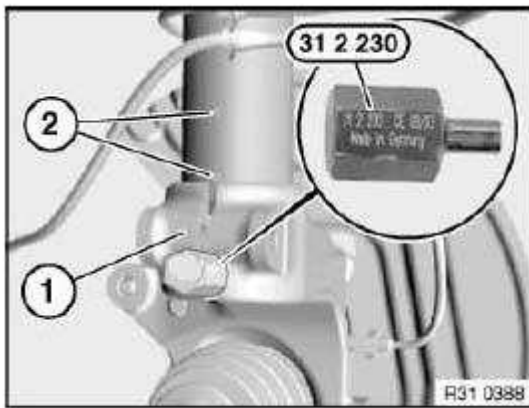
Special Tool (31 2 230) And Swivel Bearing
